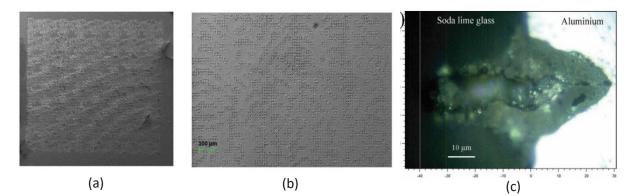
(a) Laser engraving of holographic mask on metal (b) laser engraving of PUF (c) microscopy of cross-sectional area of laser welded glass to aluminum
